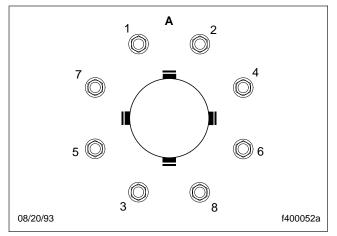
, Tightening Pattern, 8-Hole Wheels
